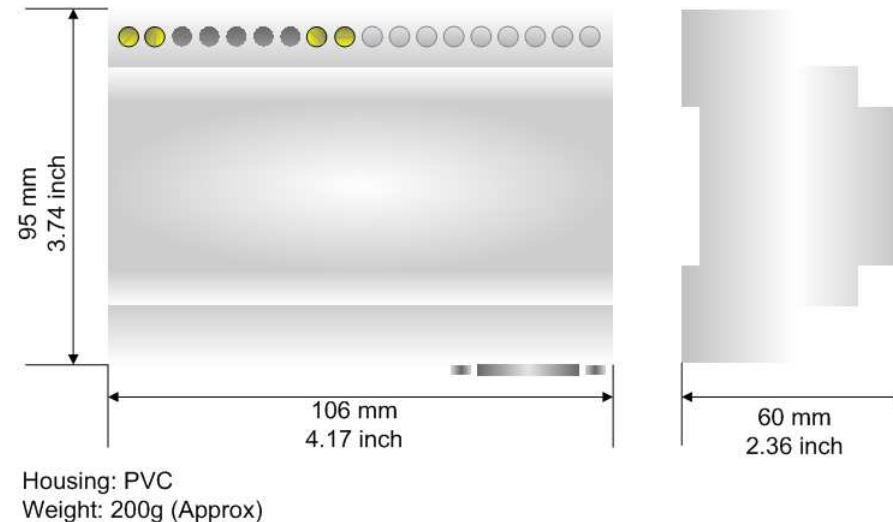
Mechanical dimensions scheme for HD67030M-40, HD67030M-80
